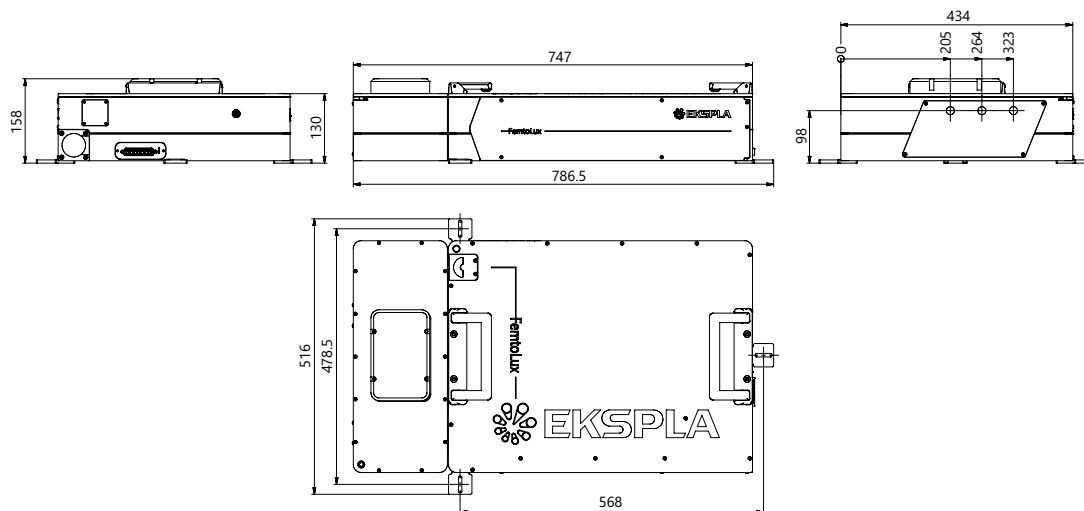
FemtoLux with harmonics module. Laser head outline drawing
